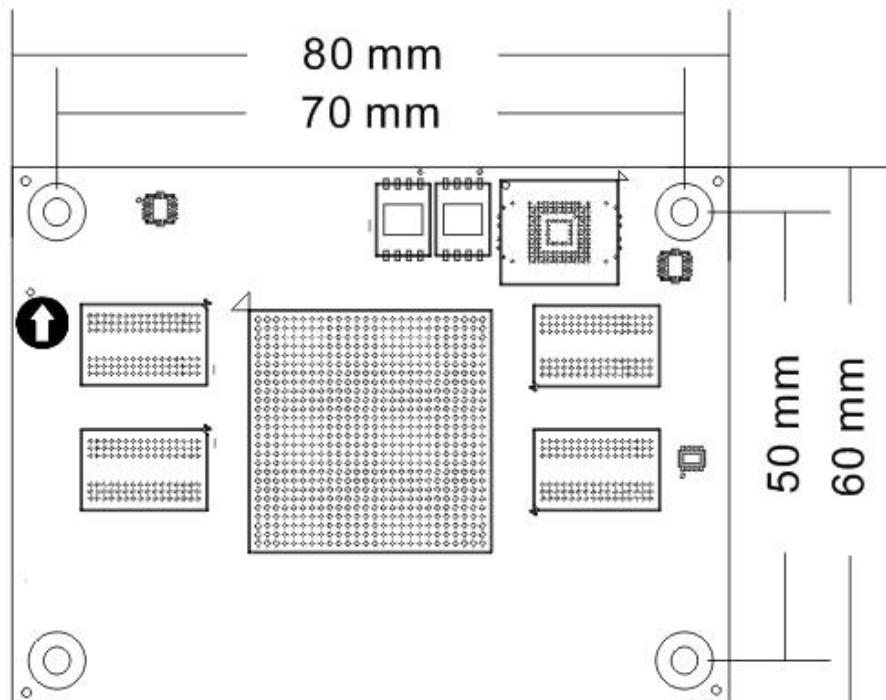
AC7Z100B Core Board Size Dimension
